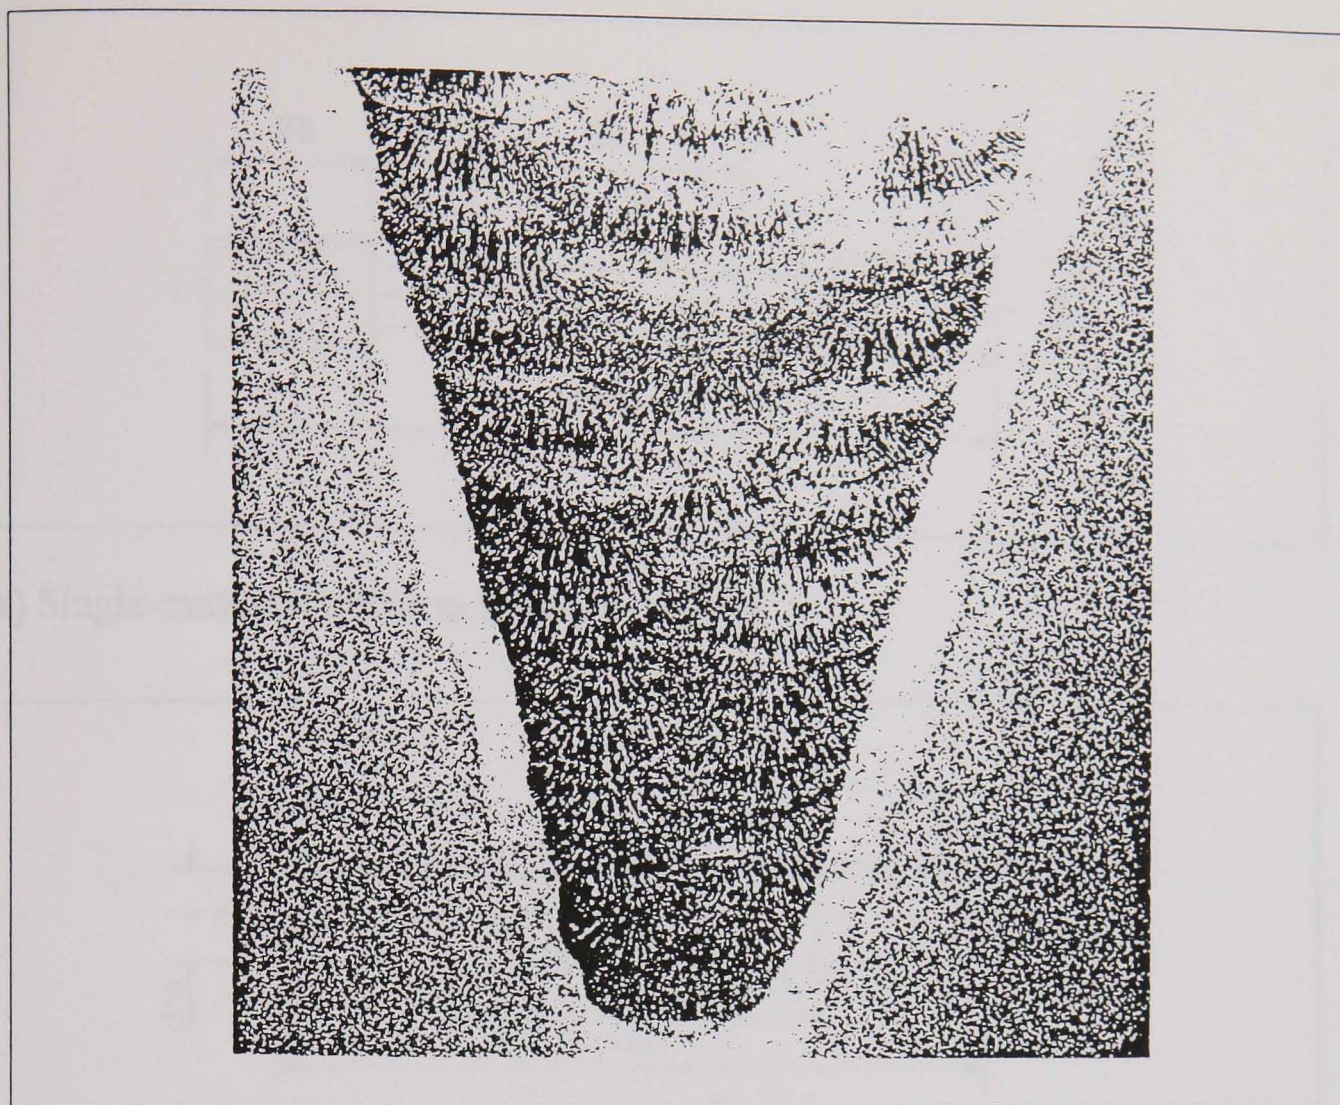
A photograph showing an etched section through 2.25Cr1Mo: 1/2Cr1/2Mo1/4V multi-pass weld (Hall and Hayhurst [1991]).
